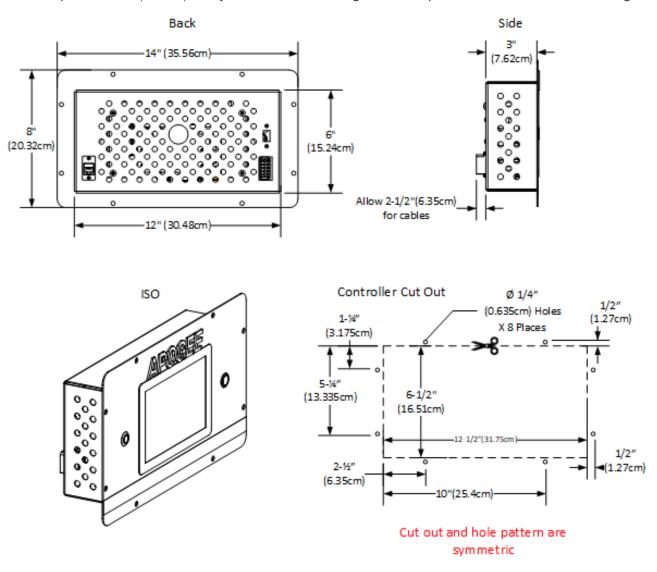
Cee® Apogee® Flange Controller Cut Sheet
